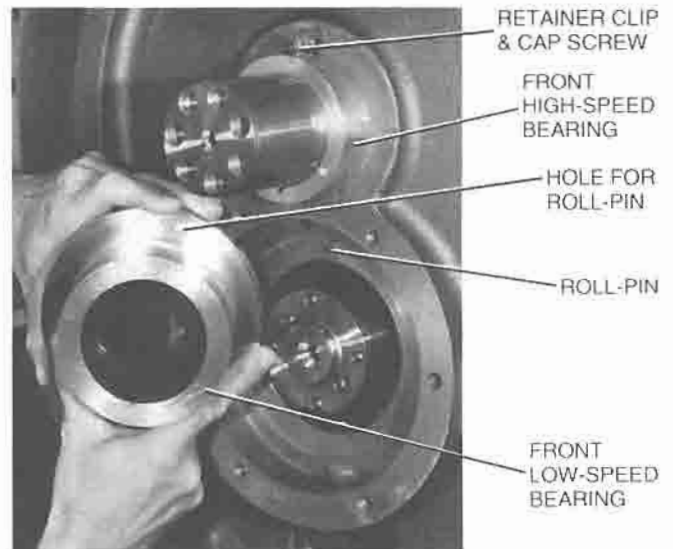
FRONT LOW-SPEED AND HIGH-SPEED BEARINGS
